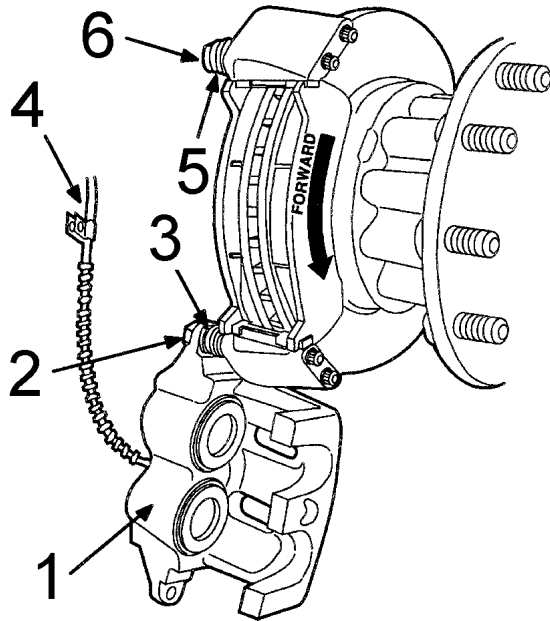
Rotate Caliper Closed About Lower Hex Mounting Bolt and Guide Pin
